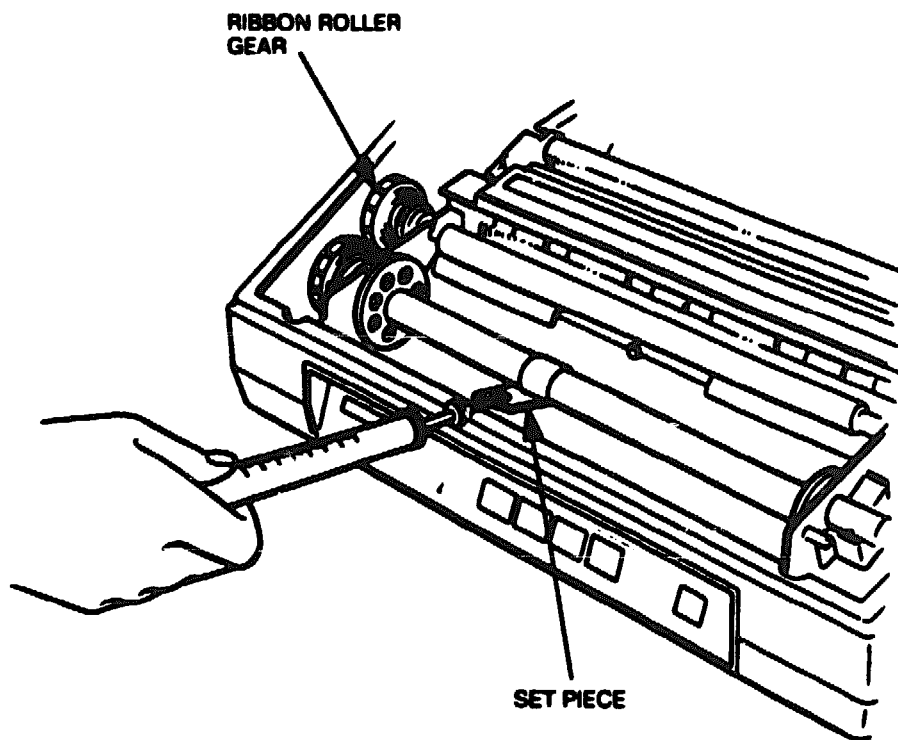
Ribbon Take-Up Roller Winding Force Adjustment
